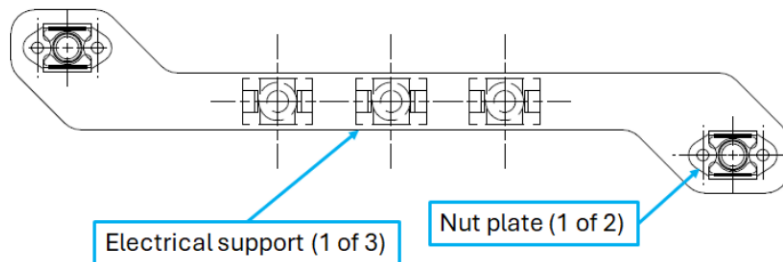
The single view of the left strip assembly in its manufacturing job card. (Courtesy of Leonardo Helicopters, modified by NTSB)
